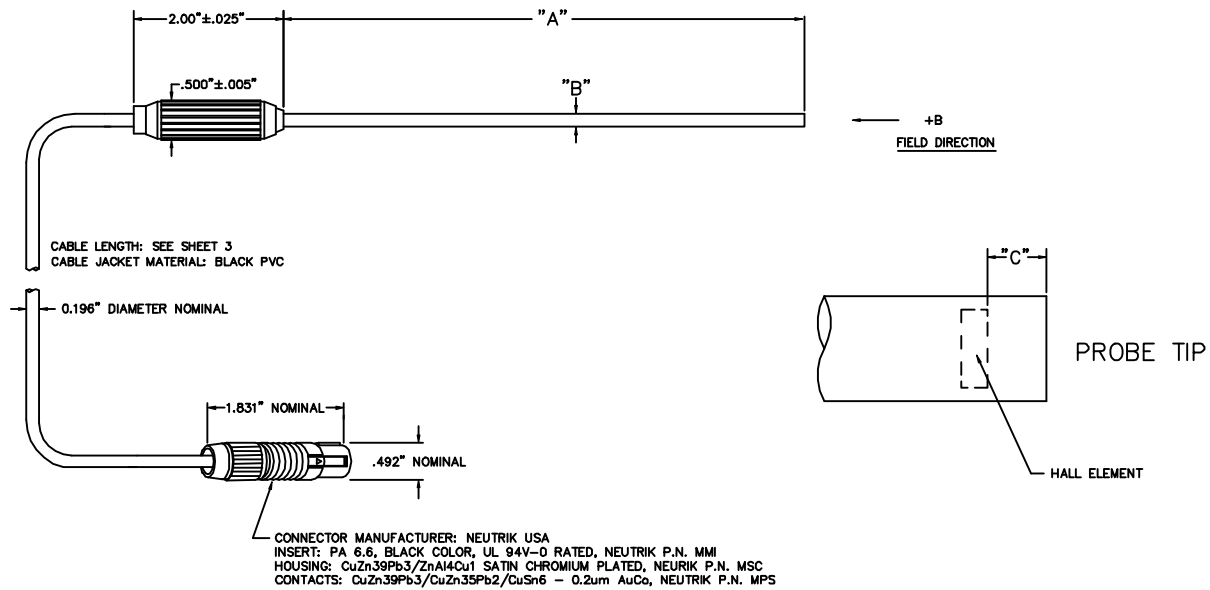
AXIAL PROBES (REF. ②5 THRU ③3)
